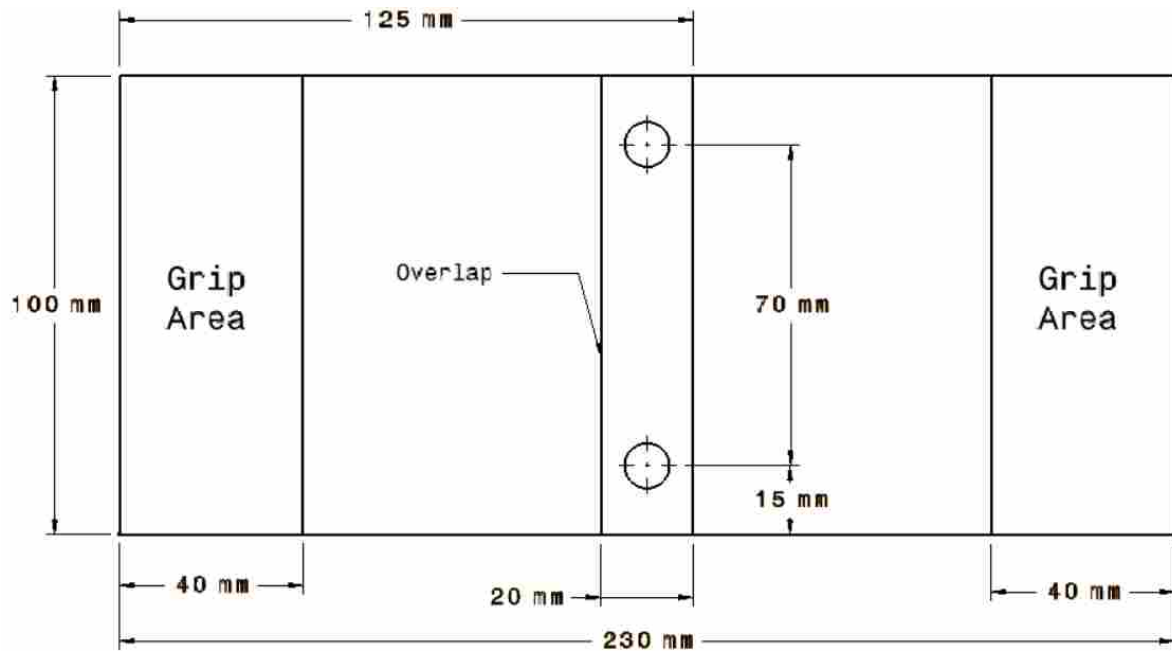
2 Weld, 70mm Spacing on 100mm Wide Lap-Shear Specimens
